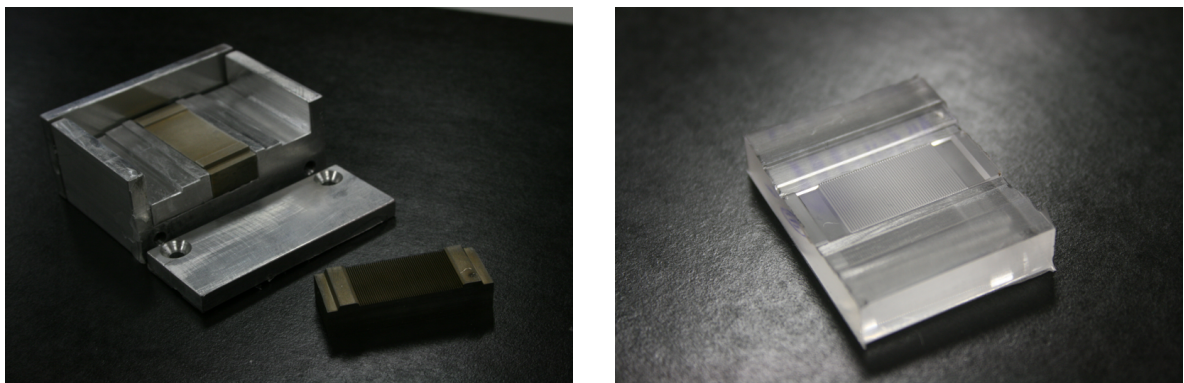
a) Photograph of the father mould and the two inserts b) Photograph of the PDMS mother moulds.
